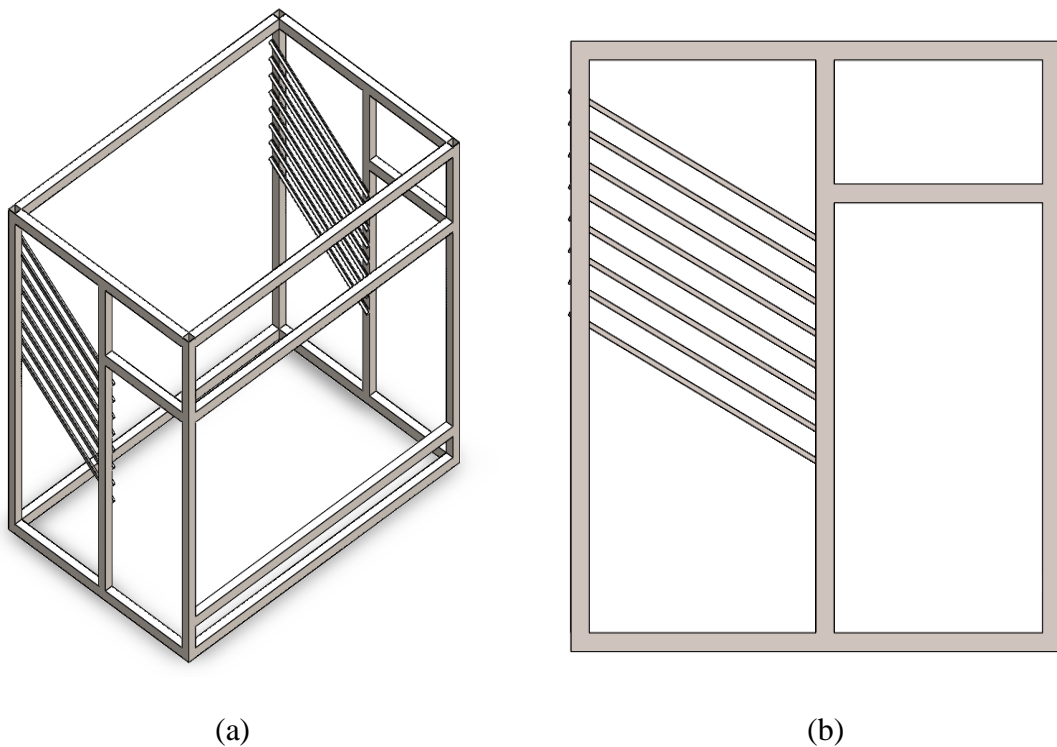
System Frame, (a) Isometric View and (b) Side View
